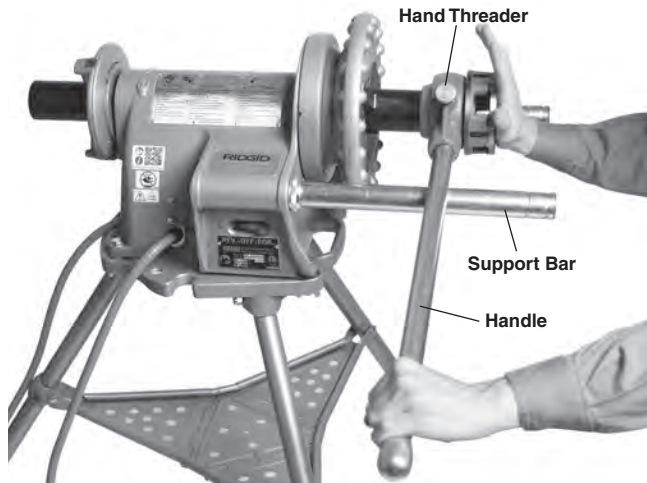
Pushing Hand Threader onto Pipe to Engage Dies
